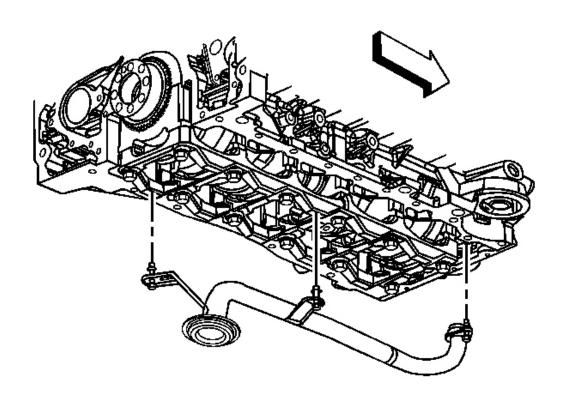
Identifying Oil Pump Pipe and Screen Assembly Courtesy of GENERAL MOTORS CORP.
